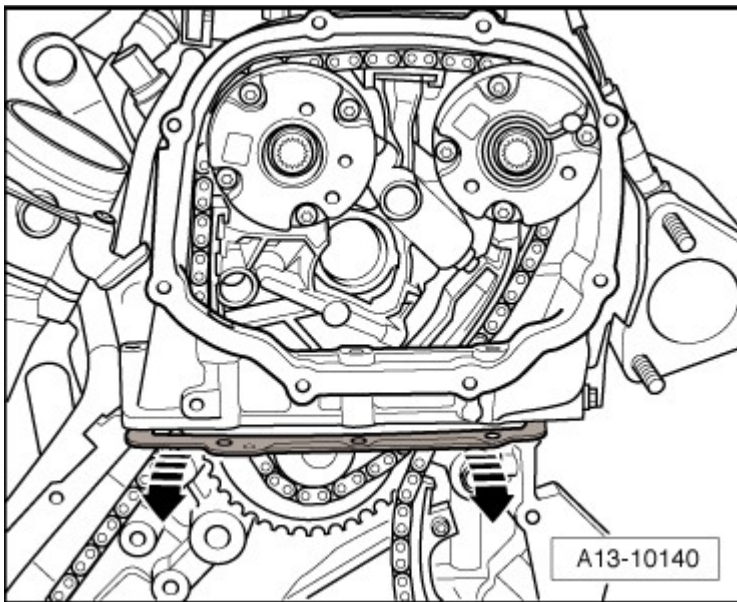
Bending Ends Of Cylinder Head Gaskets Very Slightly Downward
